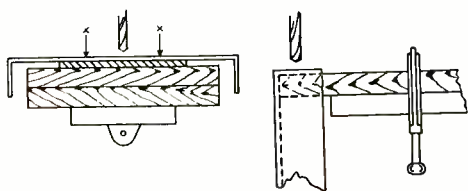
(left). Two pieces of 2 by 6 glued together with a smaller piece of hardwood for the drill to enter make an optional support for drilling a chassis.
